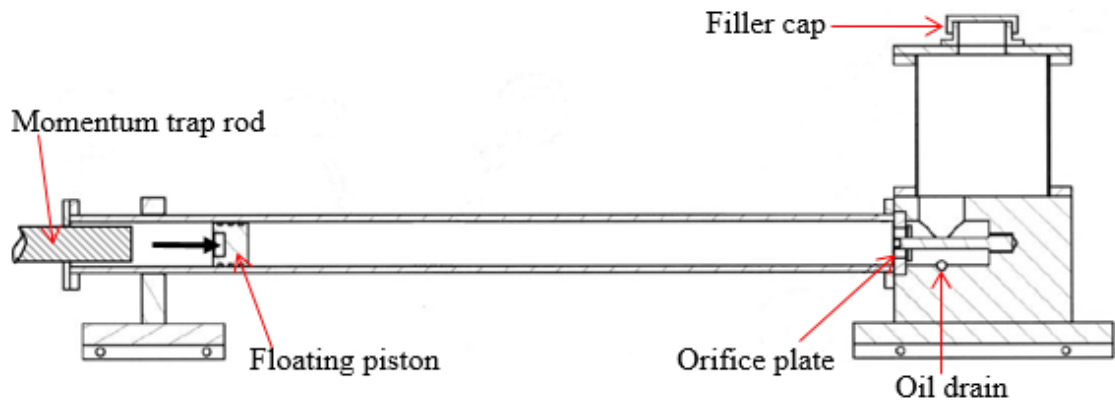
Section view of the hydraulic damper. [Ezevard, 2011].
